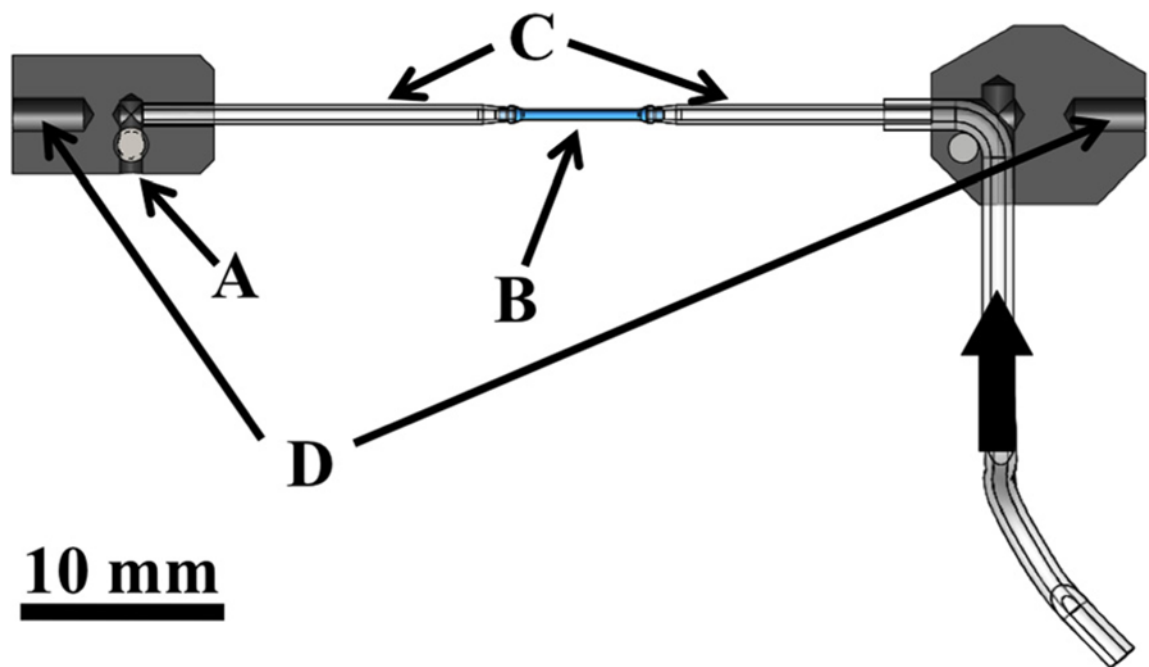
Cross section schematic of the tubular fixture pieces that fits into the testing device. (*a*) outlet flow screw, (*b*) specimen, (*c*) custom capillary tubes, (*d*) attachment pieces to push-rods in bath. Thick arrow shows the flow direction from the pump.
